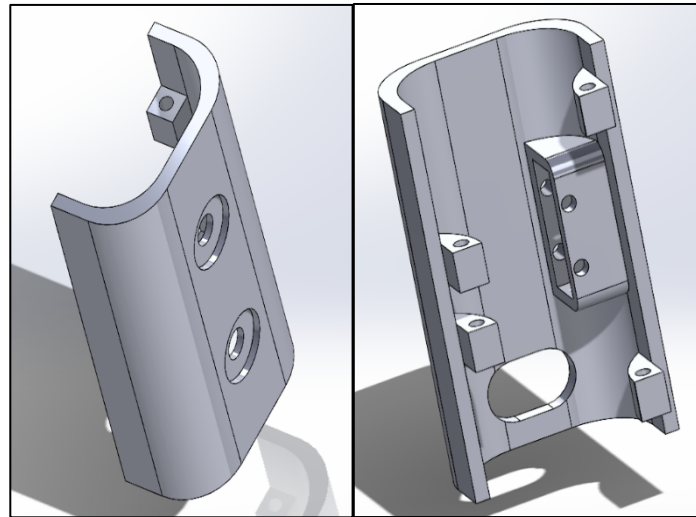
CAD of the final hand design showing the pin system as well as the mounting components
